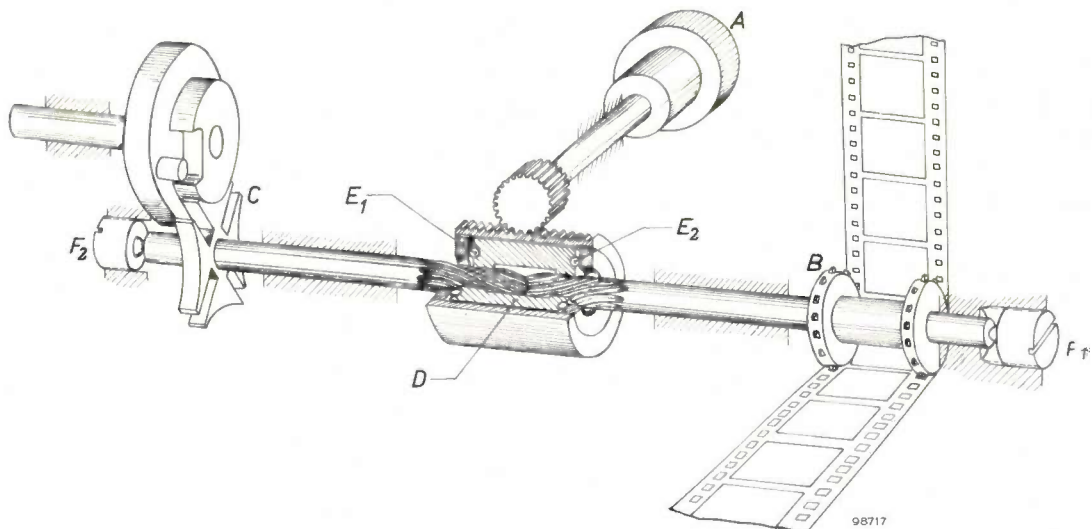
Principle of the framing device used in the FP 20 projector. A framing knob, B intermittent sprocket, C Maltese cross, D coupling sleeve, E₁ and E₂ ball-bearings, F₁ and F₂ hardened thrust bolts.
